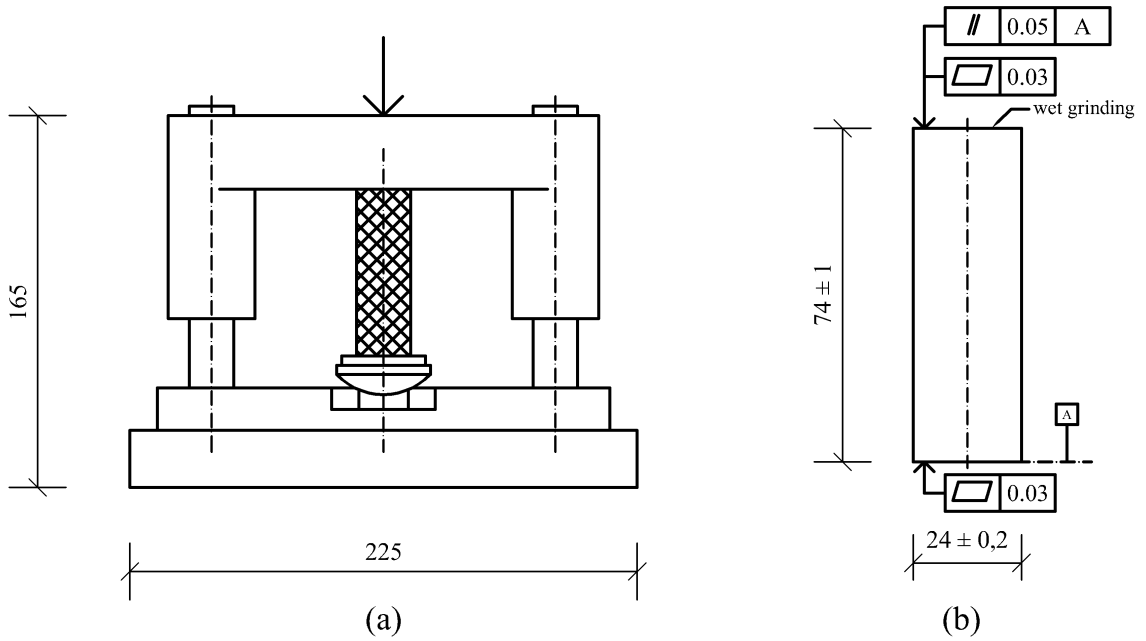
Compression test parameters: a) apparatus setup; b) specimen dimensions. [20, 21]
